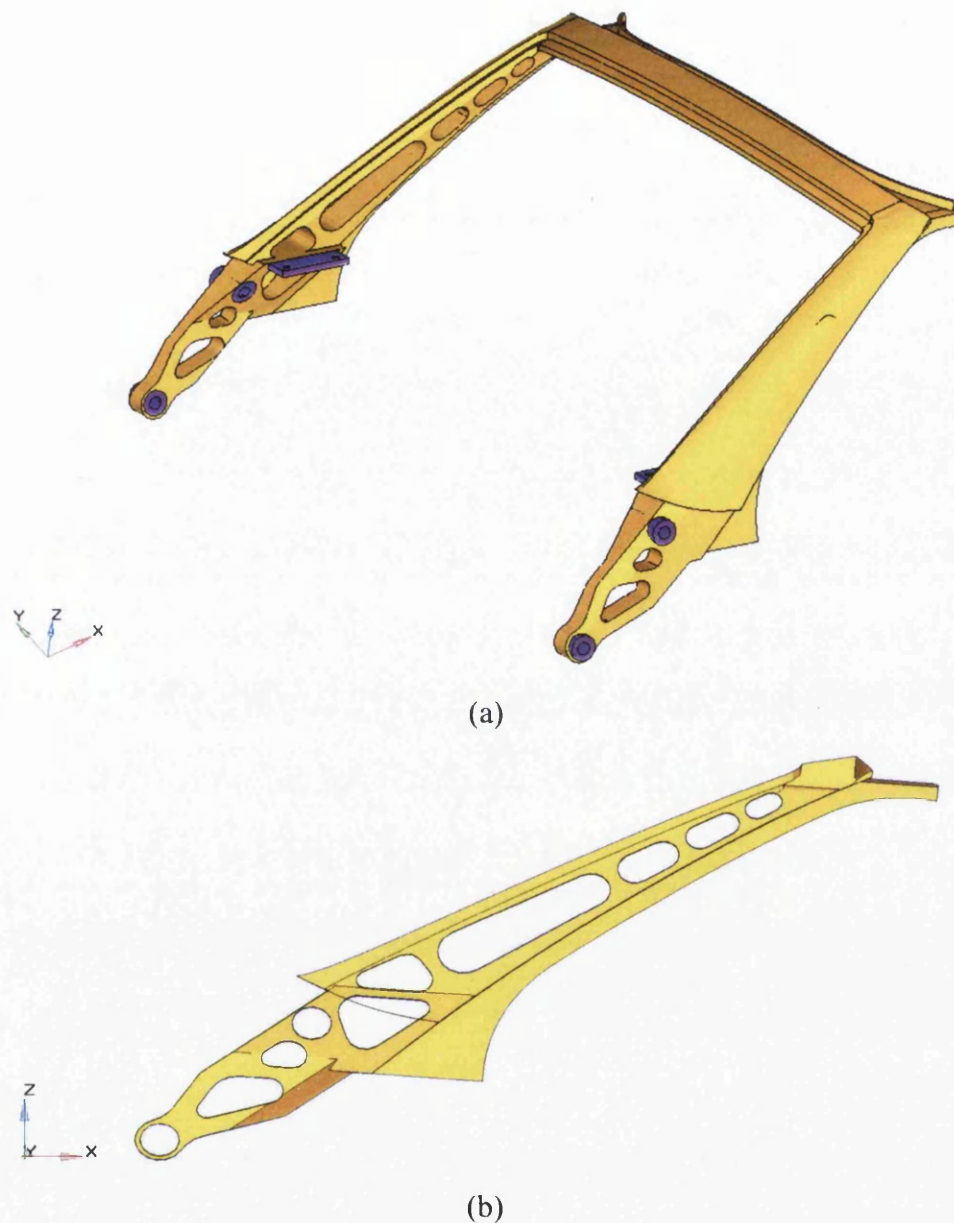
Initial concept design: (a) angled view; (b) cross-sectional view
